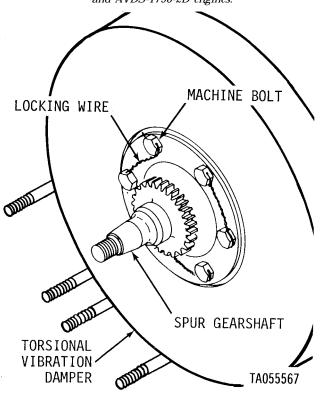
Removing or installing power tale-off spur gearshaft, model AVDS-1790-2DR engine.
